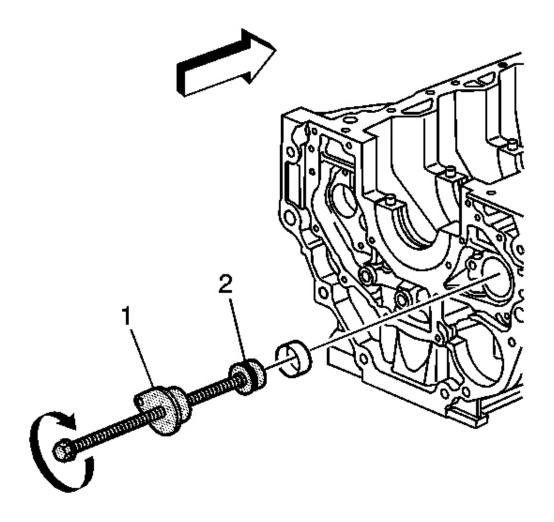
Installing Left Balance Shaft Bearing Courtesy of GENERAL MOTORS CORP.
